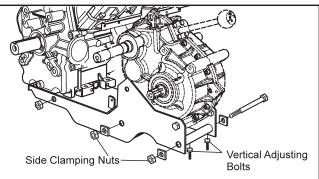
Location of power pack clamping nuts and adjusting bolts
